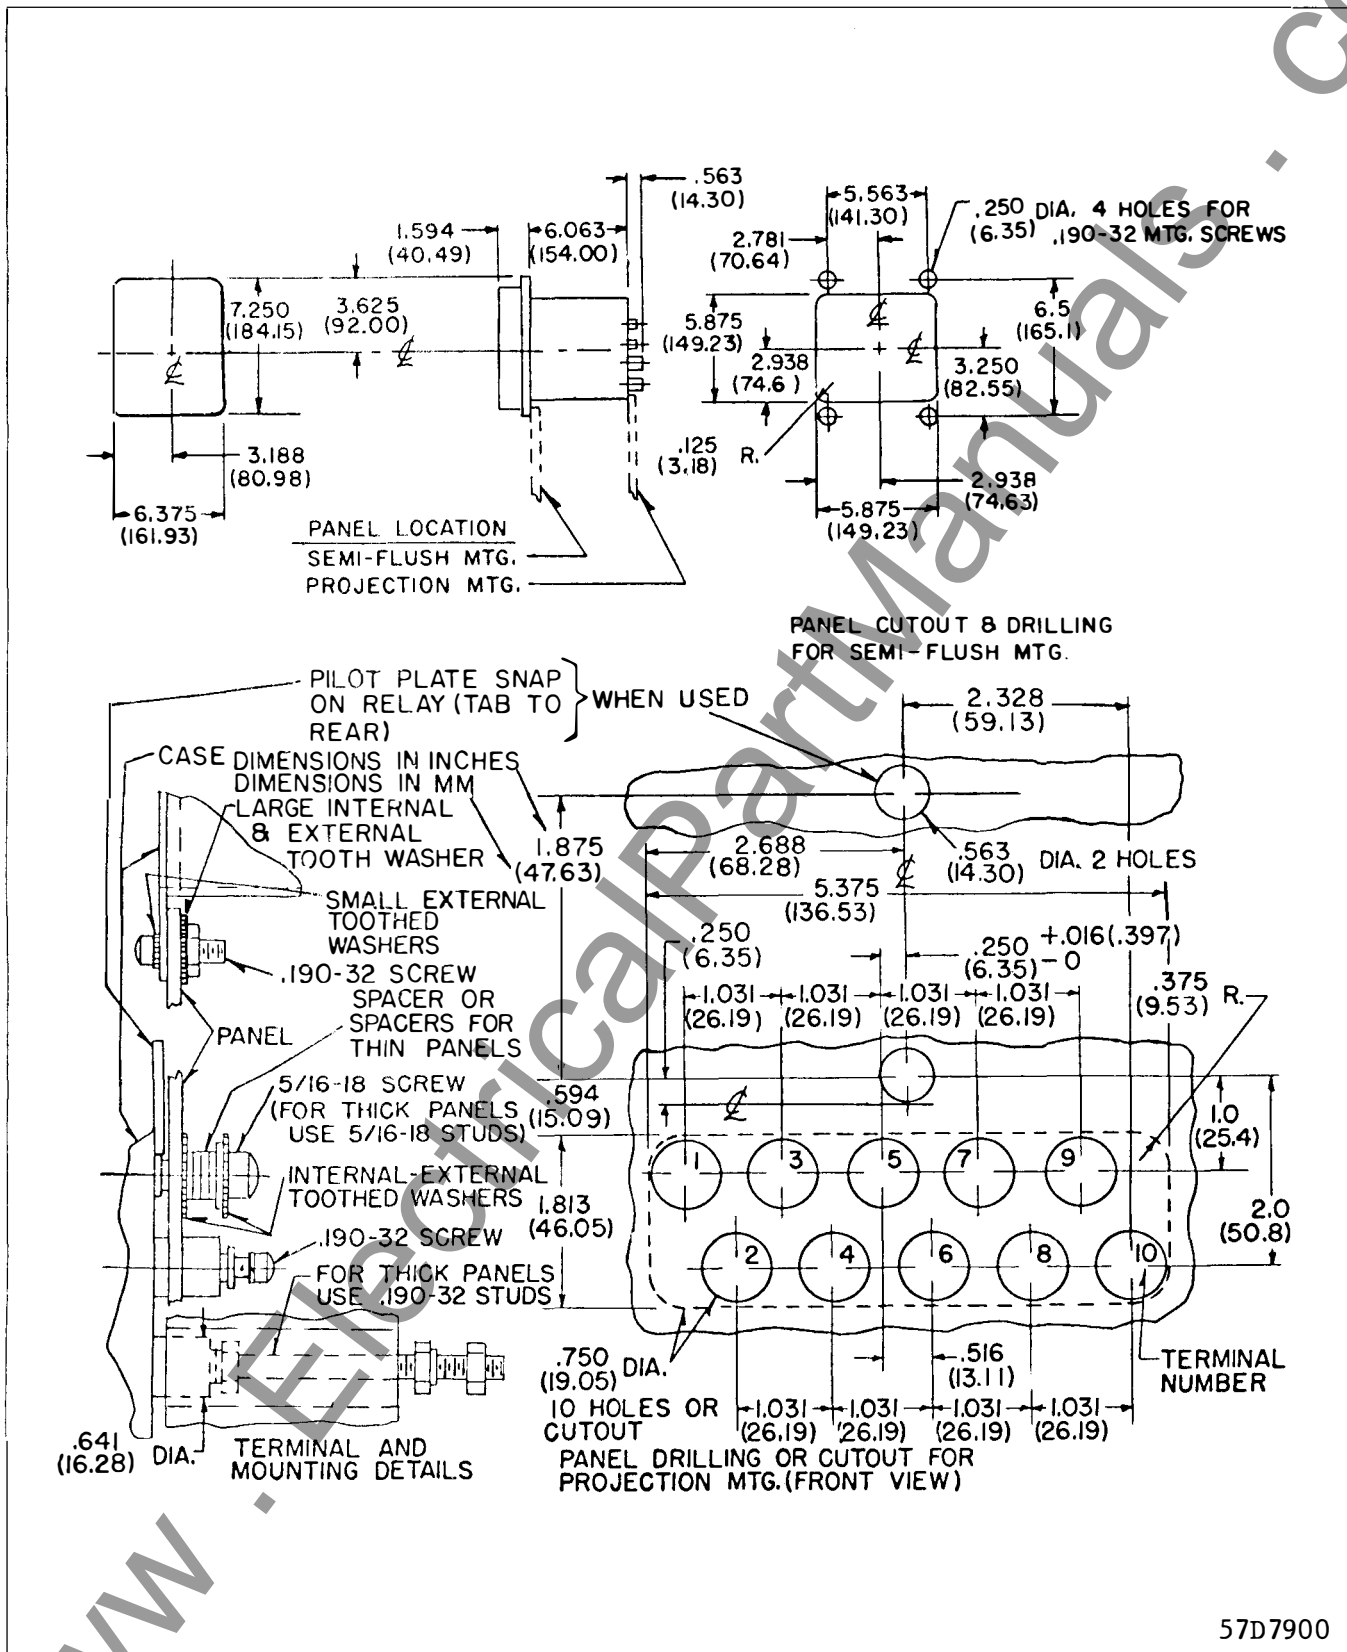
Outline and Drilling Plan for the Type FT11 Case
